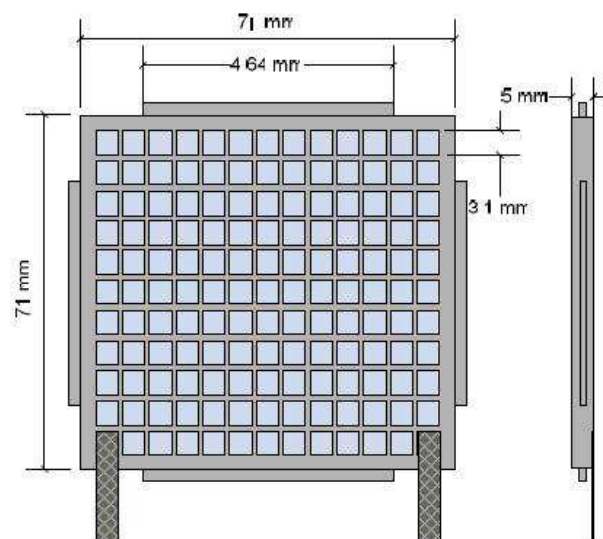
Dimensions of a HZ-20 Thermoelectric Module
